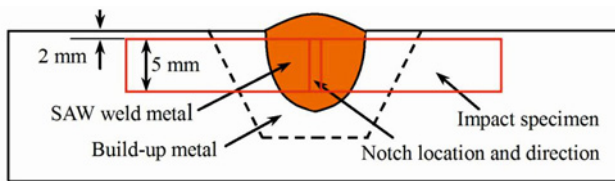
Preparations of the experimental weld metal and impact specimen.
